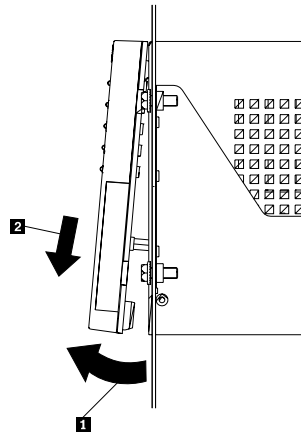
Removing the controller-unit bezel (machine types 3526 and 3552)
